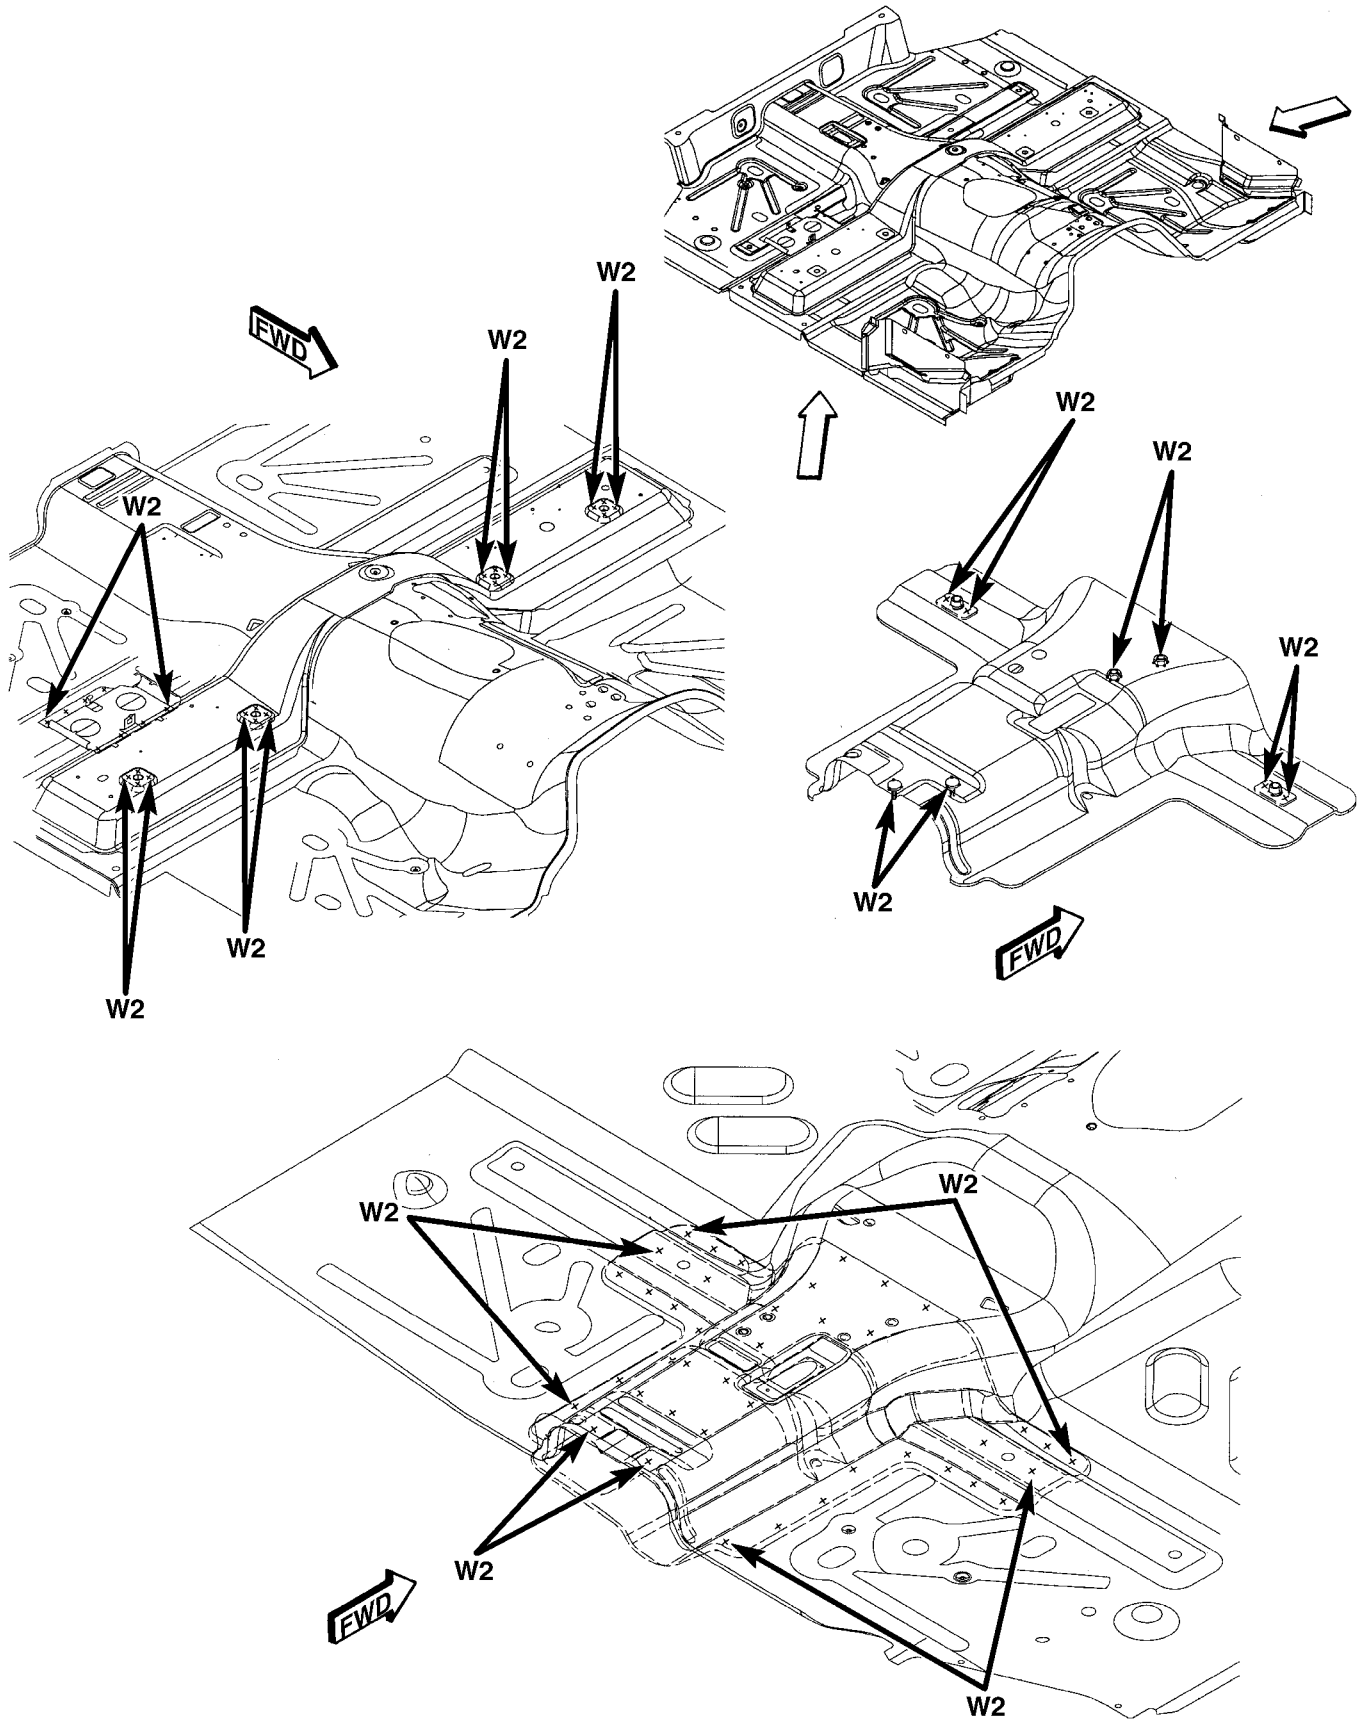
FRONT FLOOR PAN (3 OF 3)
